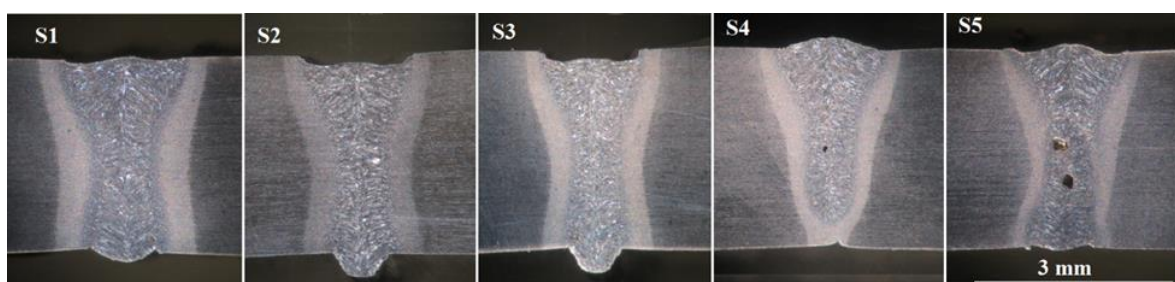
Cross-sections macrographs of the welded series.
